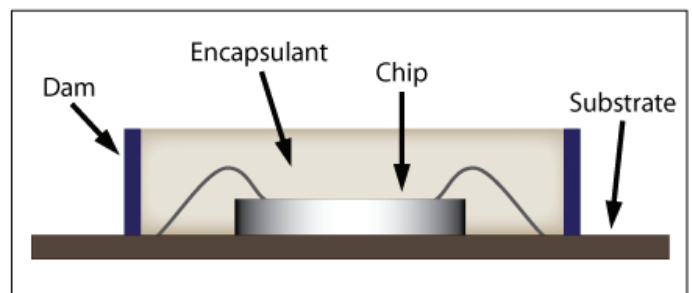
Wire Bonded Assembly with Glob Top Epoxy Encapsulant, Dam and Fill ⁽²⁾
